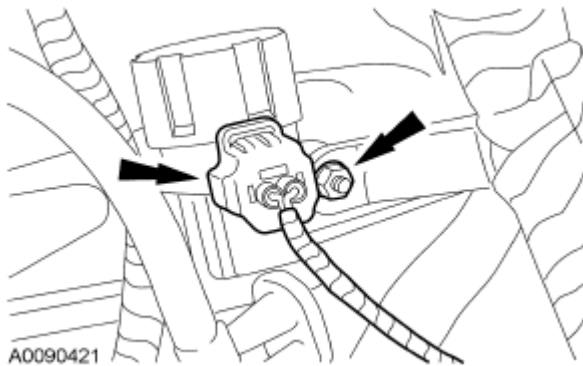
Locating Exhaust Gas Recirculation (EGR)
